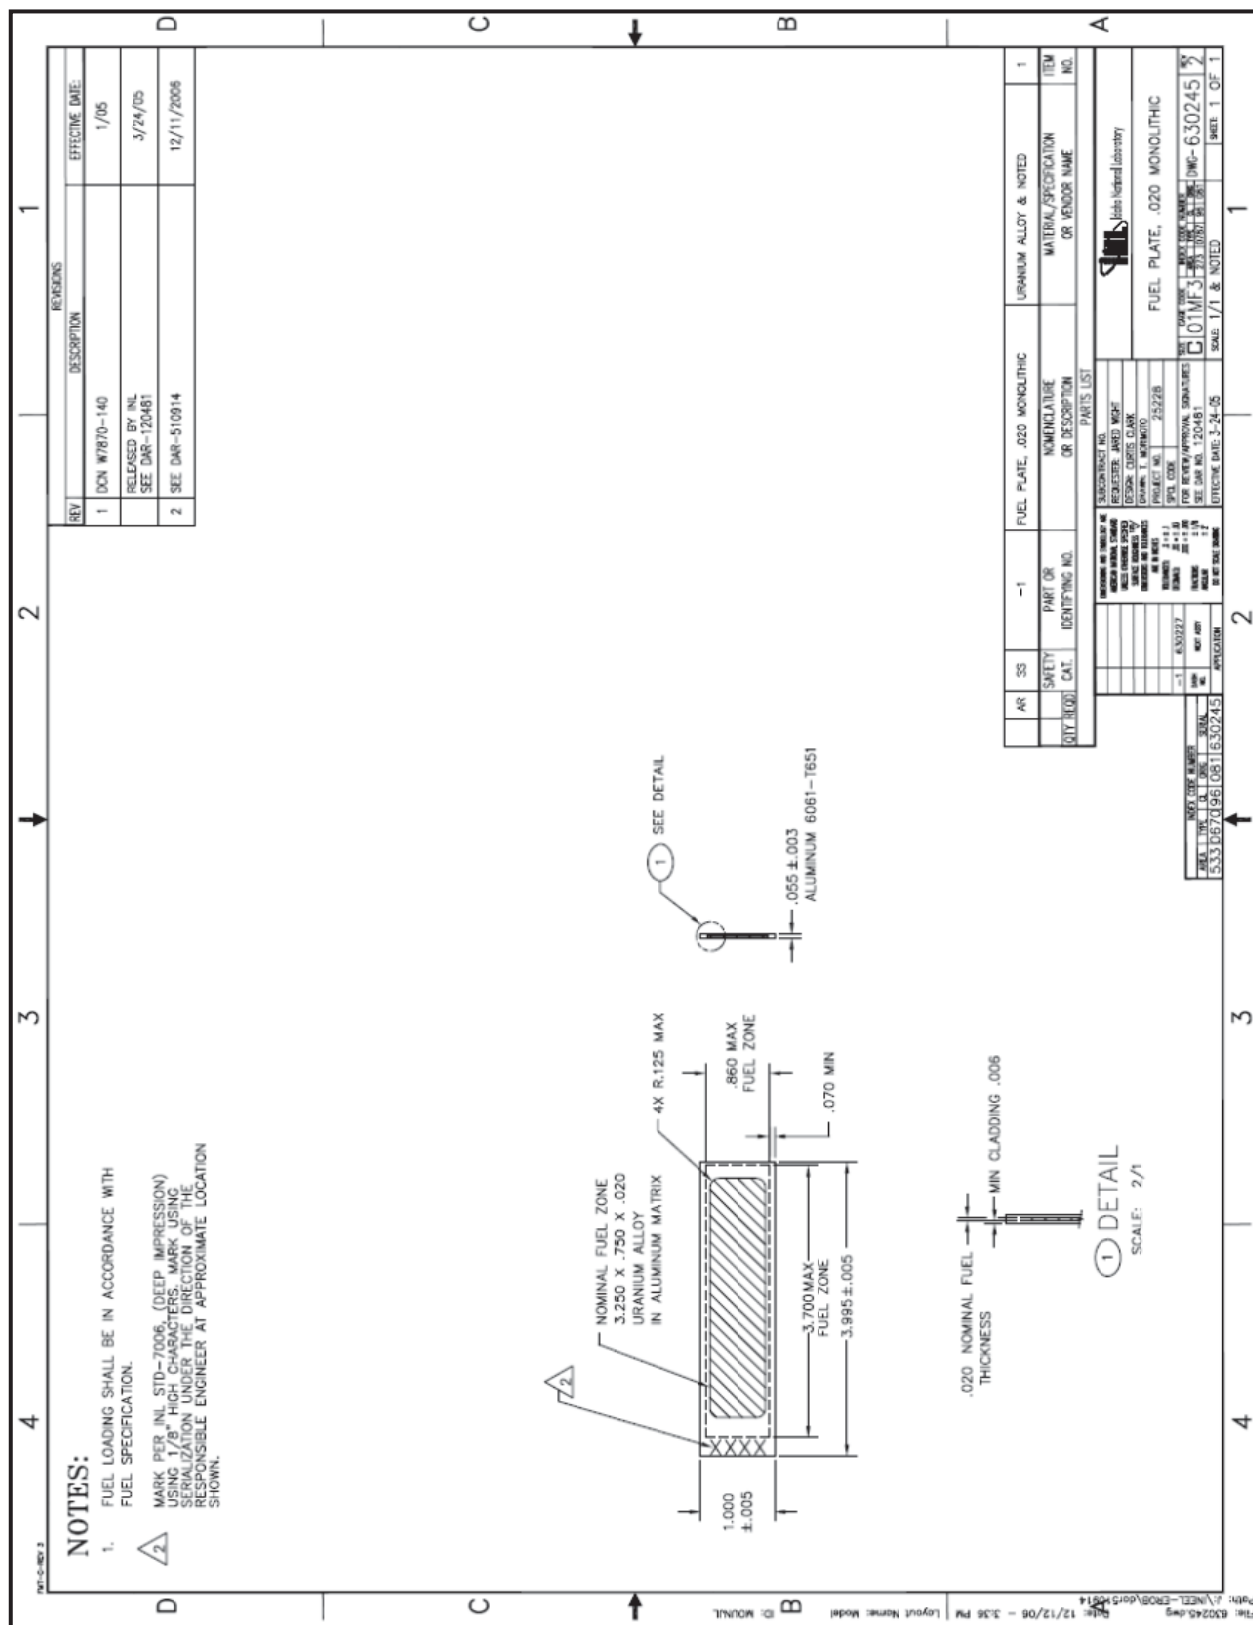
DWG-630245: RERTR thick (0.020 in) monolithic fuel miniplate.
